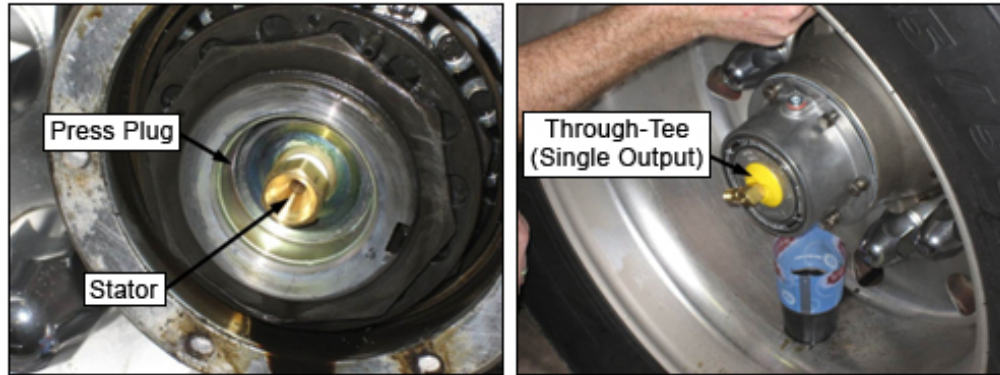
Grouped photo. Wheel end assembly with press plug and stator (left) and through-tee (right).
